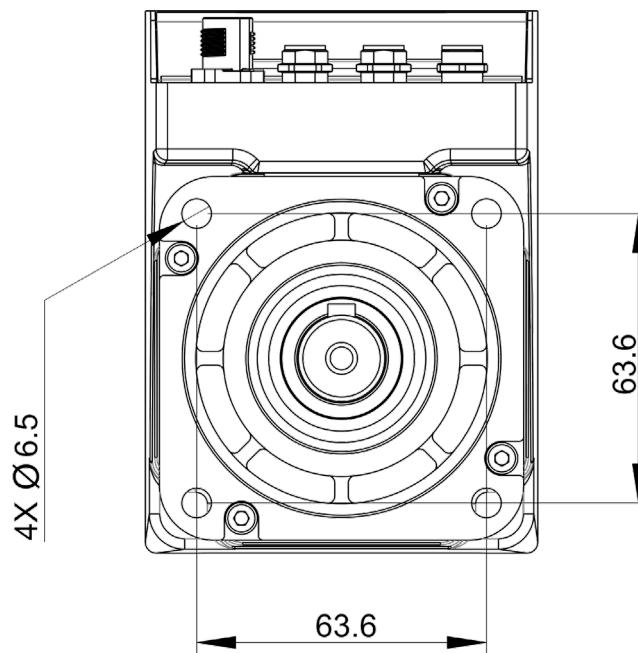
Front View Details and Rotor Shaft/Keyway Details
